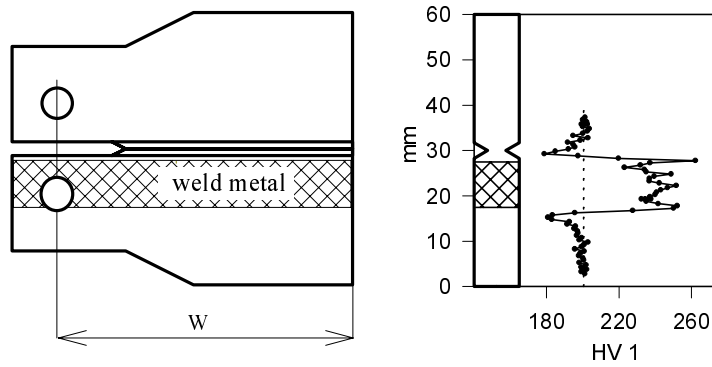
The weldment in the sidegrooved TDCB – sample, $W = 65$ mm.
